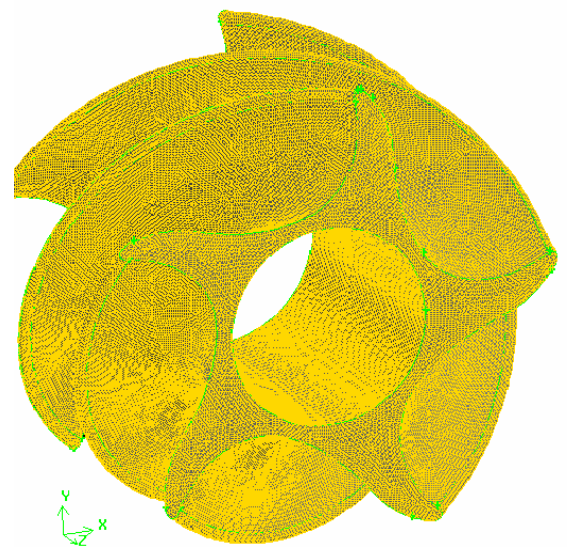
(d): Meshing of Female rotor by subtracting inside rotor
